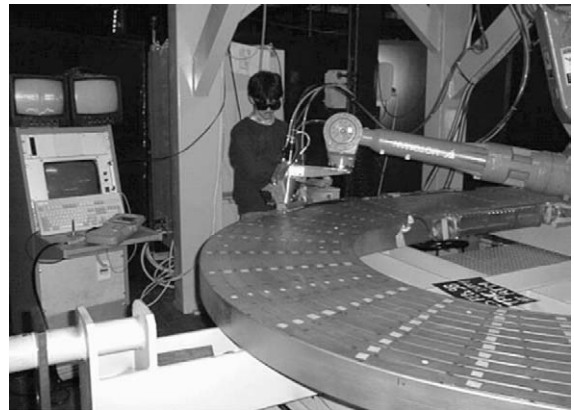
Laser welding of the covers onto the conductor grooves of the radial plate with automatic tracker system.
